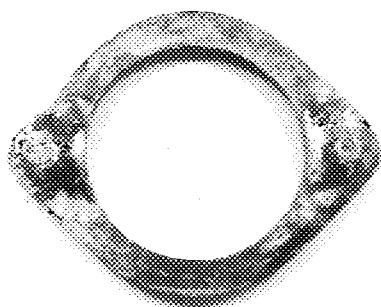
TOP MOUNT REINFORCEMENT - FRONT.
